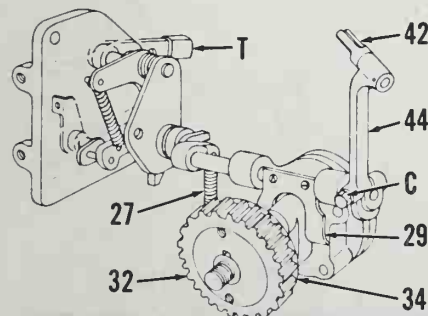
Diagram of governor assembly. Refer to text for operation and adjustment.
